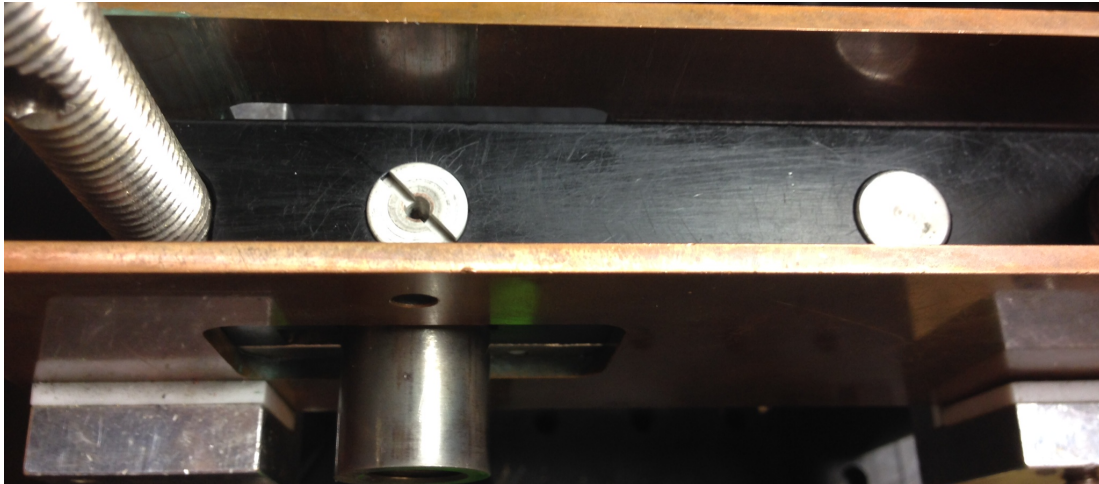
Assembly step 8. View from the top of the assembly with non-conductive cylinder and metal cylinder inserted
